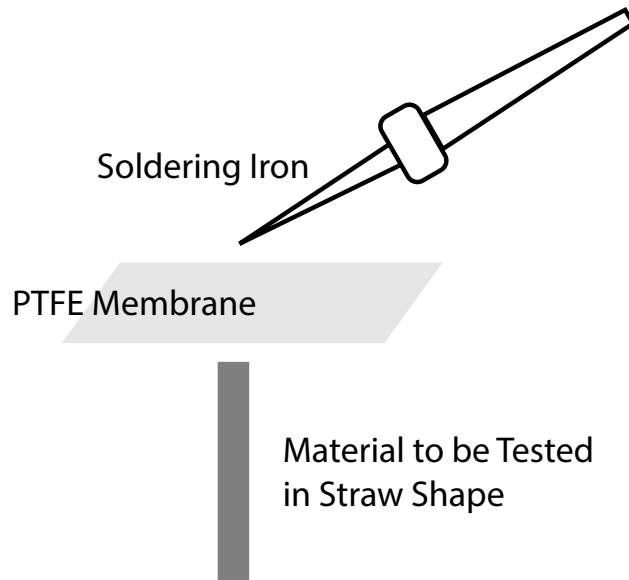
Thermal welding test setup. A soldering iron was heated and used to press the membrane onto the material to be tested with a straw structure.
